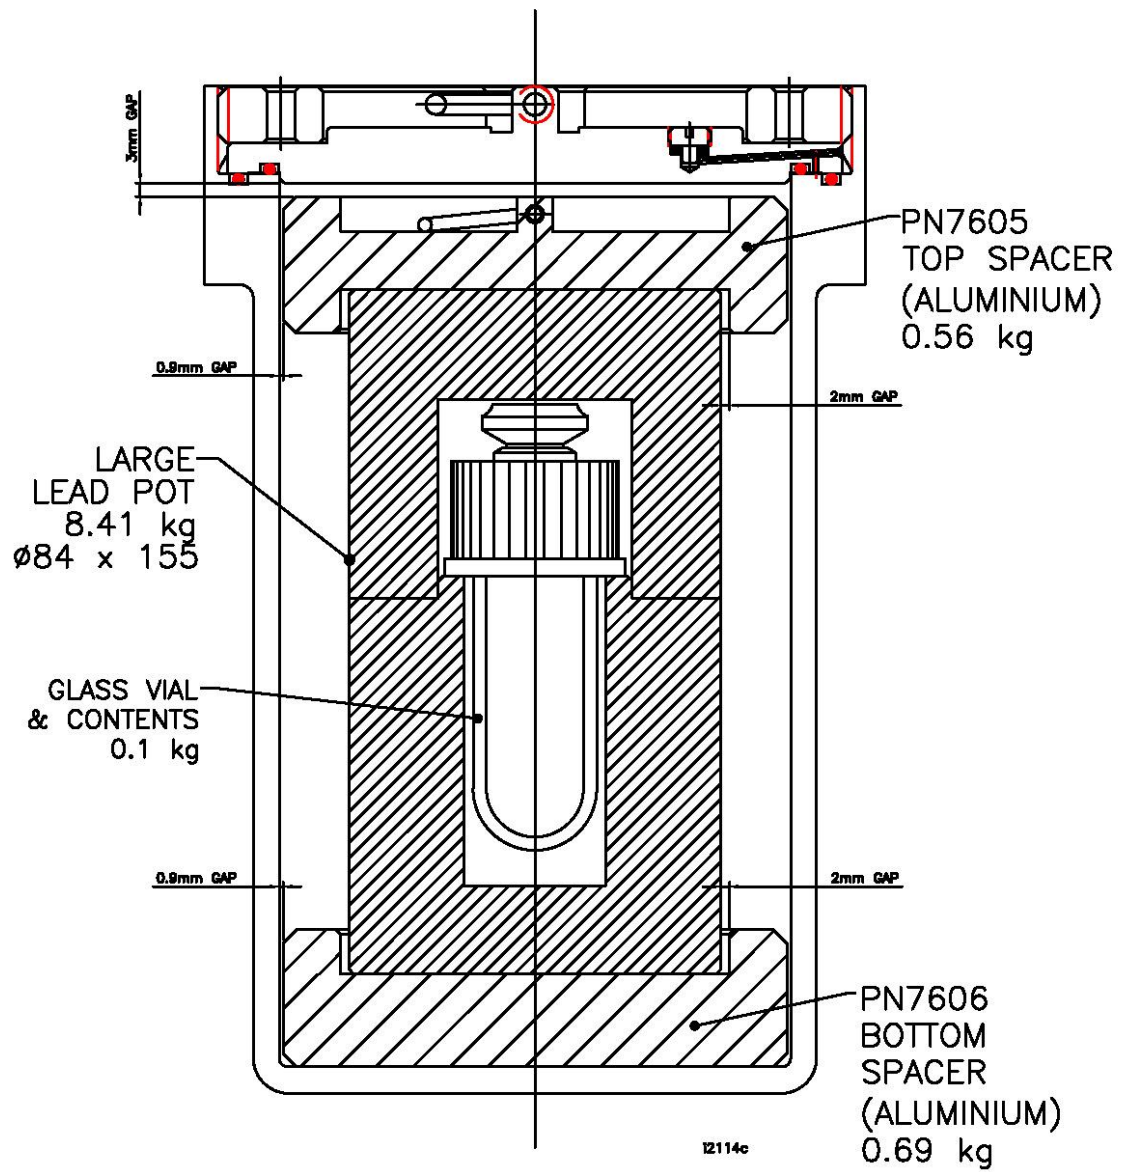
INNERMOST PACKAGING ARRANGEMENT 2
